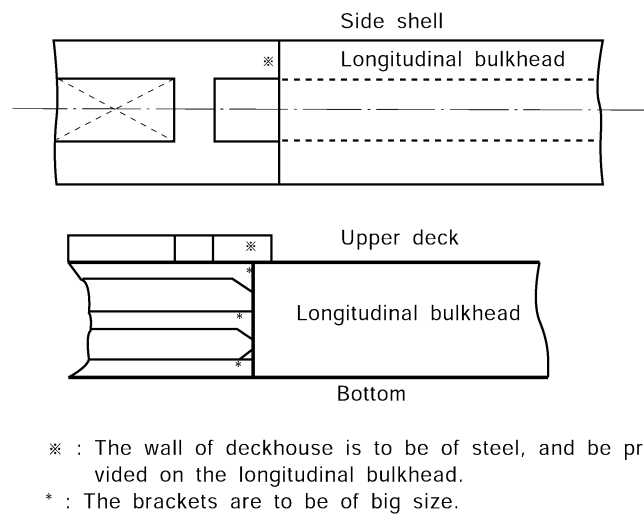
Continuity of after end of longitudinal bulkhead
